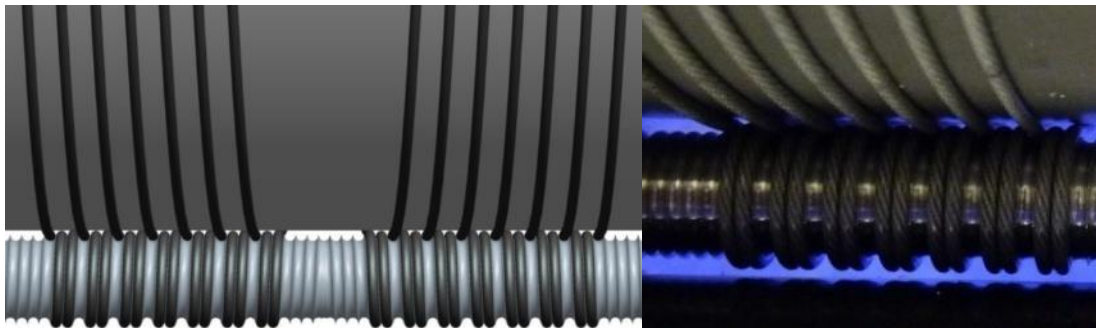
CAD rendering of input shaft and close up photograph of cables.
